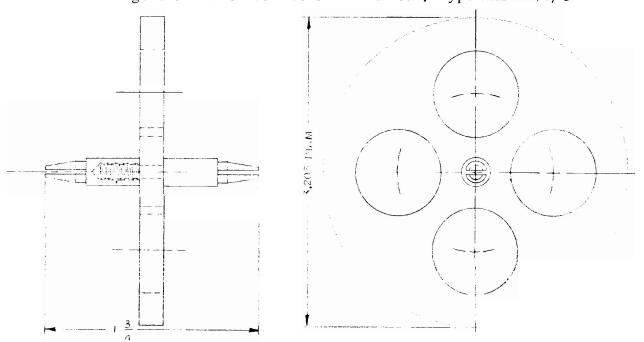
Inner Conductor Connector, Type MX-1600/U
